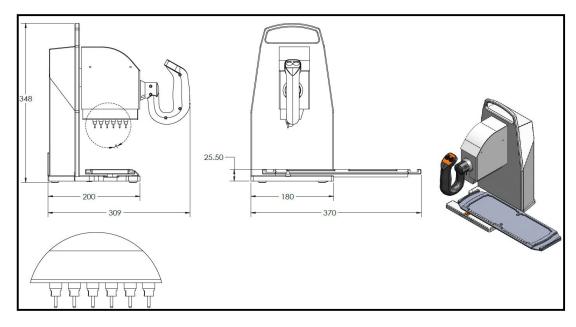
Semi-Automated Screw Cap Decapper 6 Dimensions
